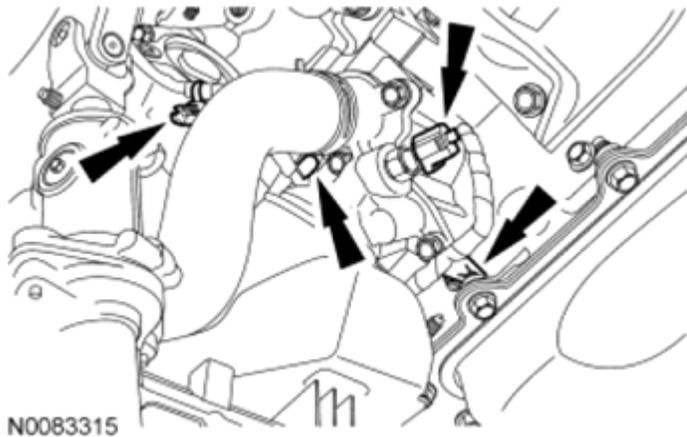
Locating Engine Oil Pressure (EOP) Switch Electrical Connector And Wiring Harness Retainers
